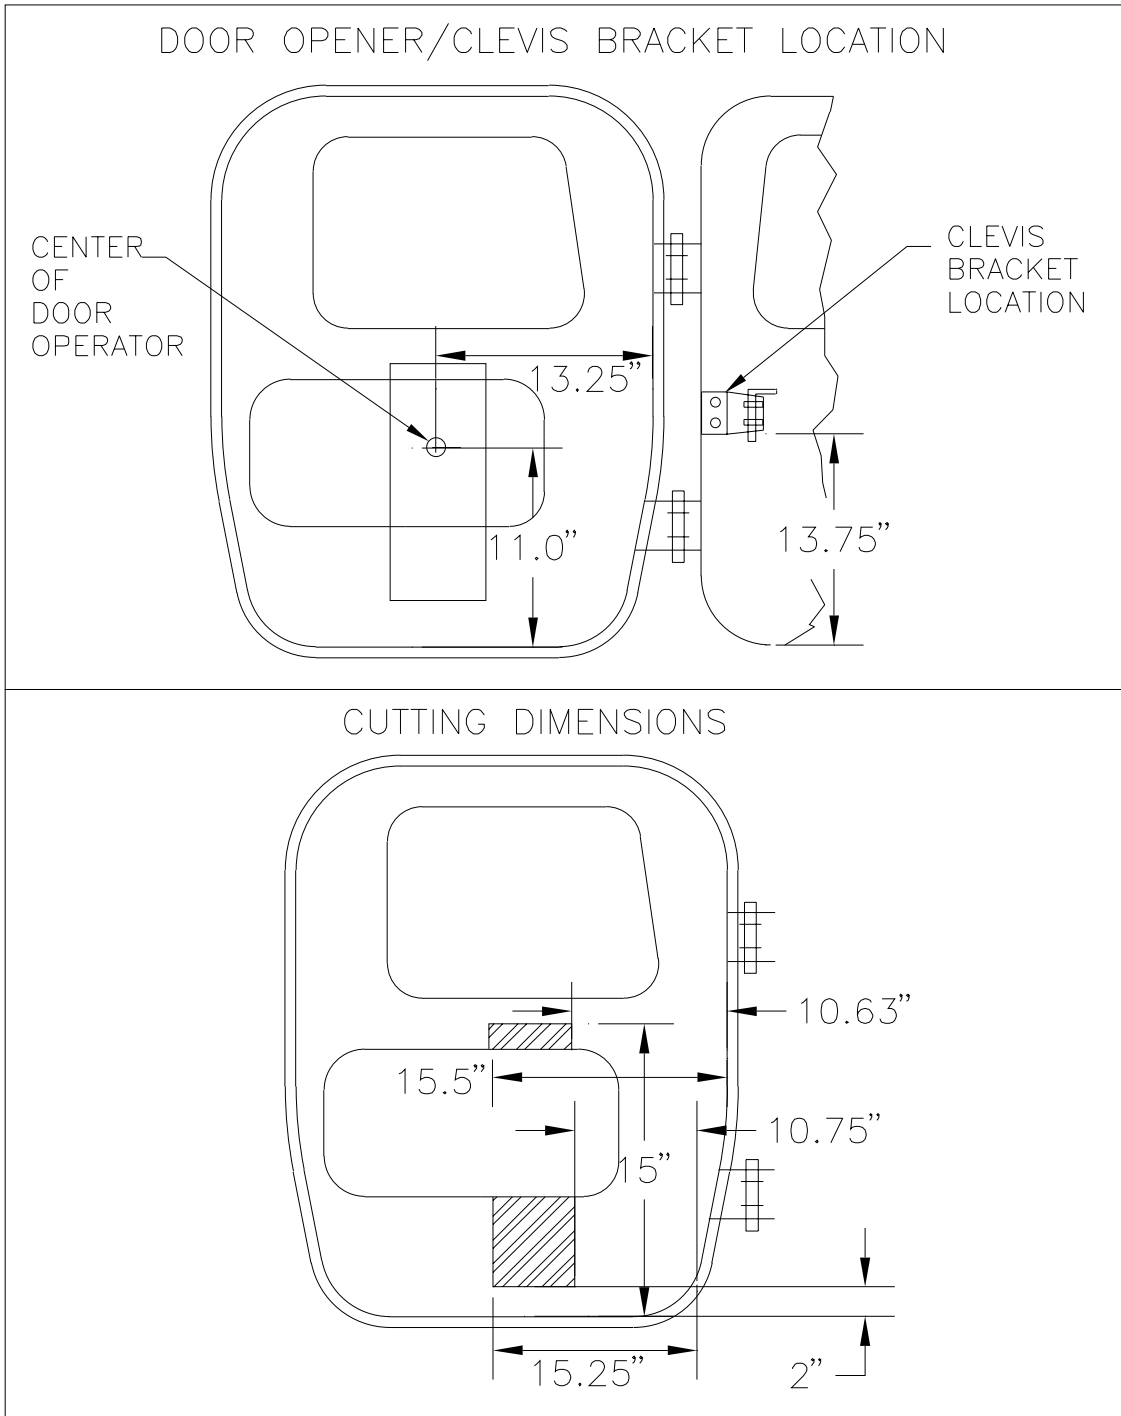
DIMENSIONS FOR CUTTING AND MOUNTING CLEVIS BRACKET IN LEFT REAR DOOR
